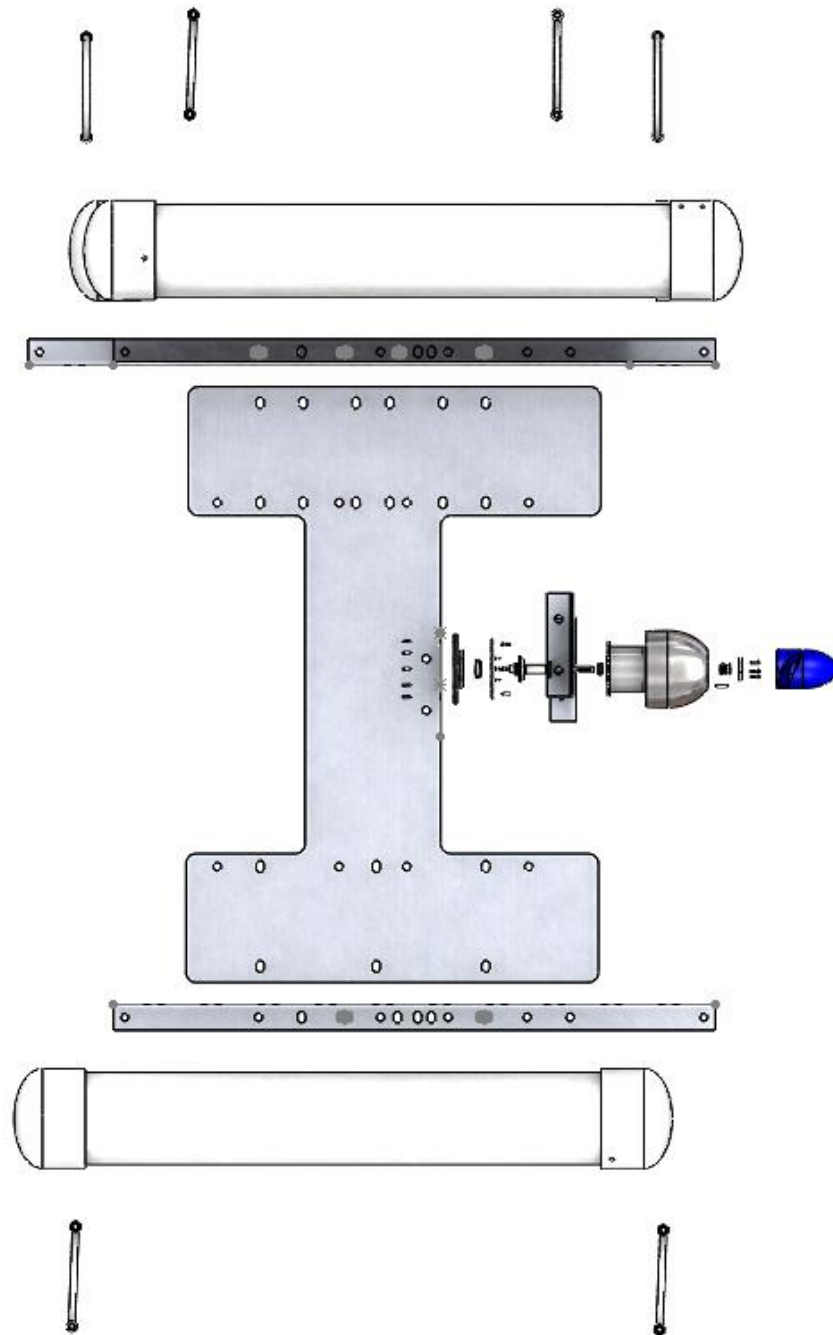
Exploded view of the all the components comprised in the field prototype of the single rotor tethered CT-HKT system.
